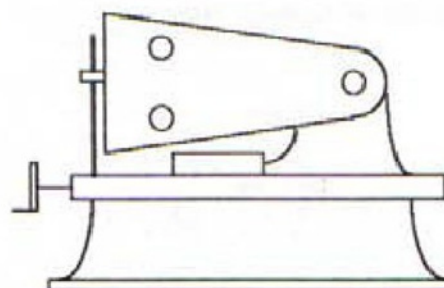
Brown and Sharpe swinging head milling machine, 1895.
